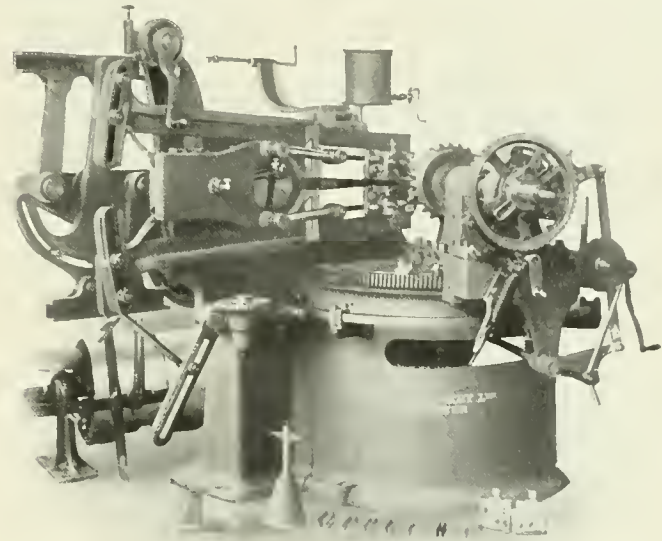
Robey-Smith Bevel Gear Planer with Improved Indexing Mechanism
